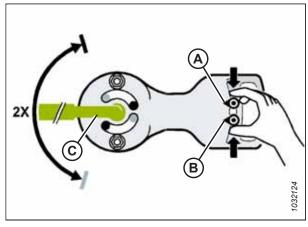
Wing Balance Adjustment – Left Side Shown
